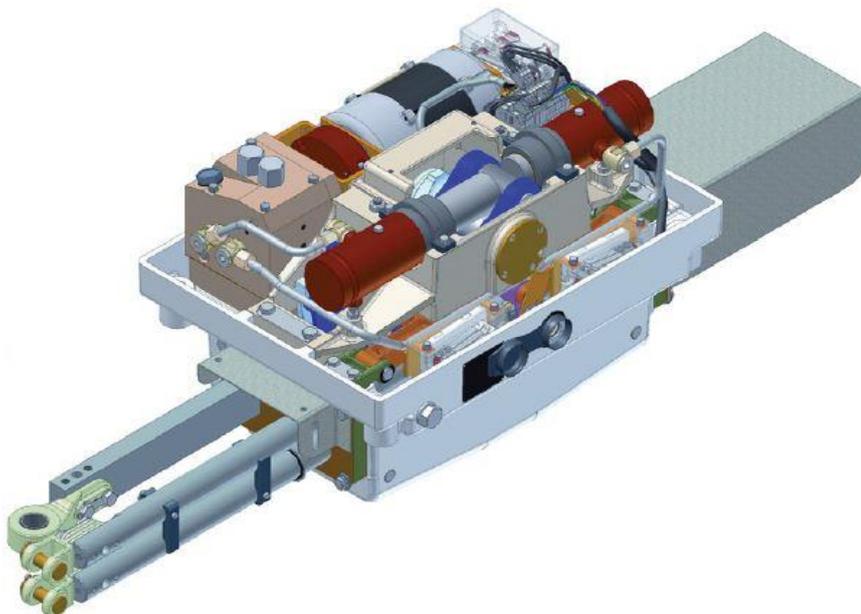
Inside view of the FieldTrac 6343 L826H point machine [22]
